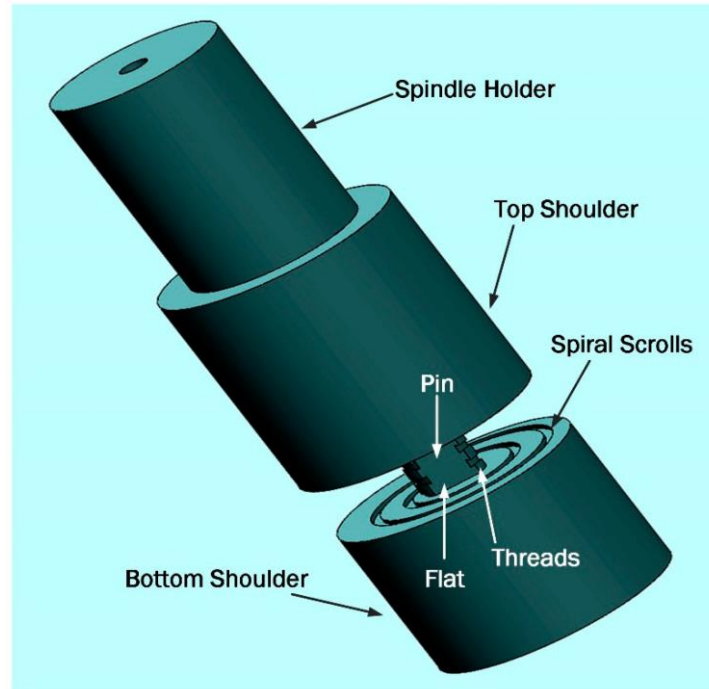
Schematic of the fully-featured Bobbin-Tool (tri-flat threaded pin and spiral scrolled shoulders).
